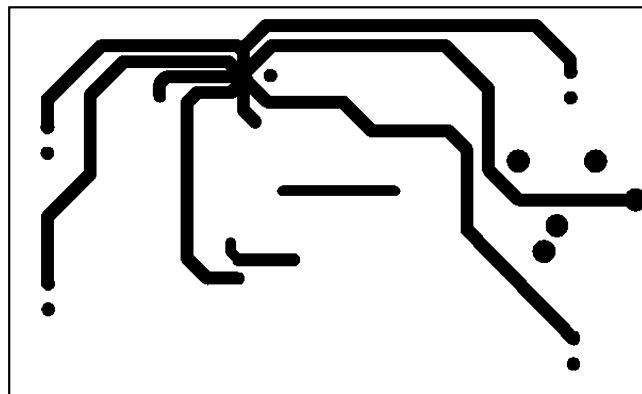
Recommended VSSOP Board Layout: Bottom Layer
